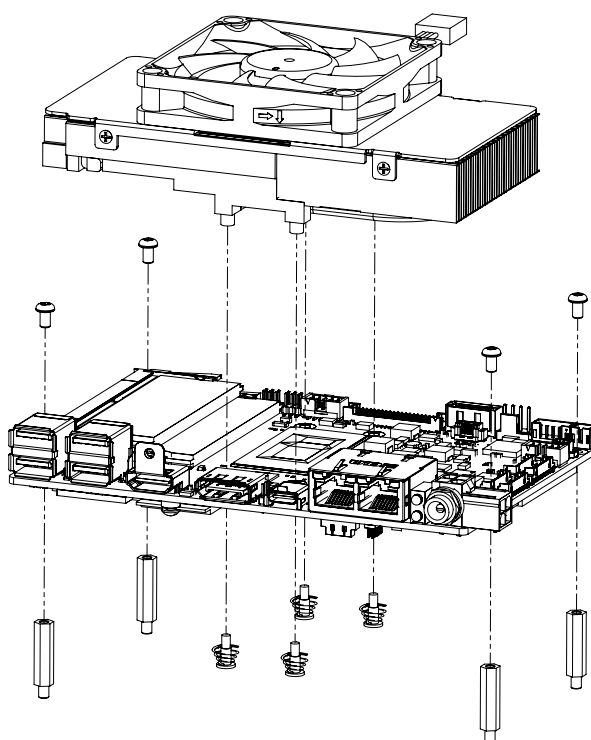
MIO-5375 Mechanical Drawing (with Heat Spreader)
